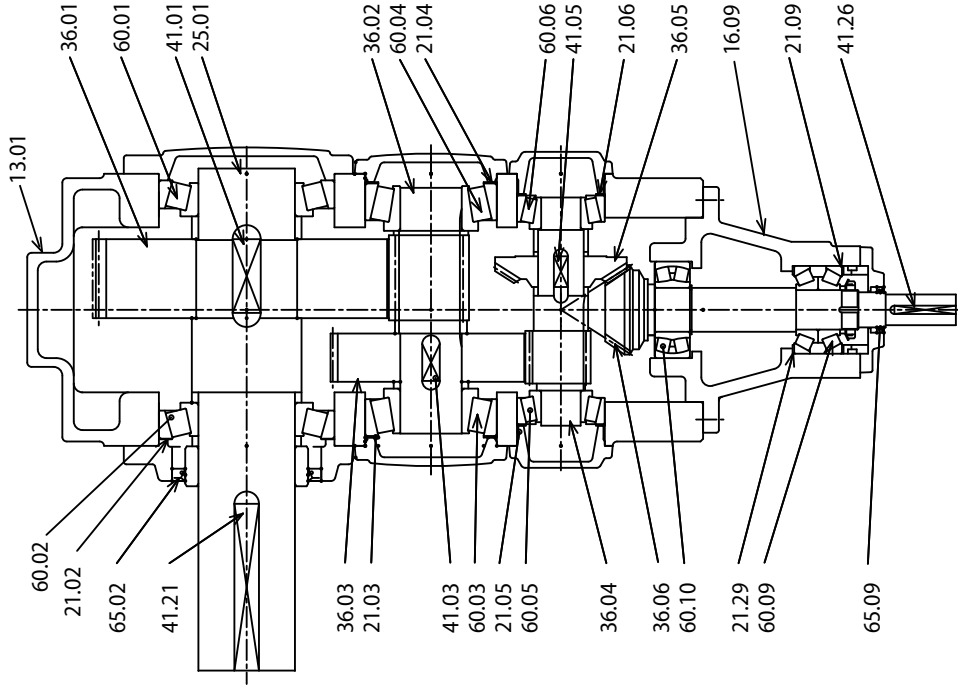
Right Angle Shaft, Vertical- Double Reduction
